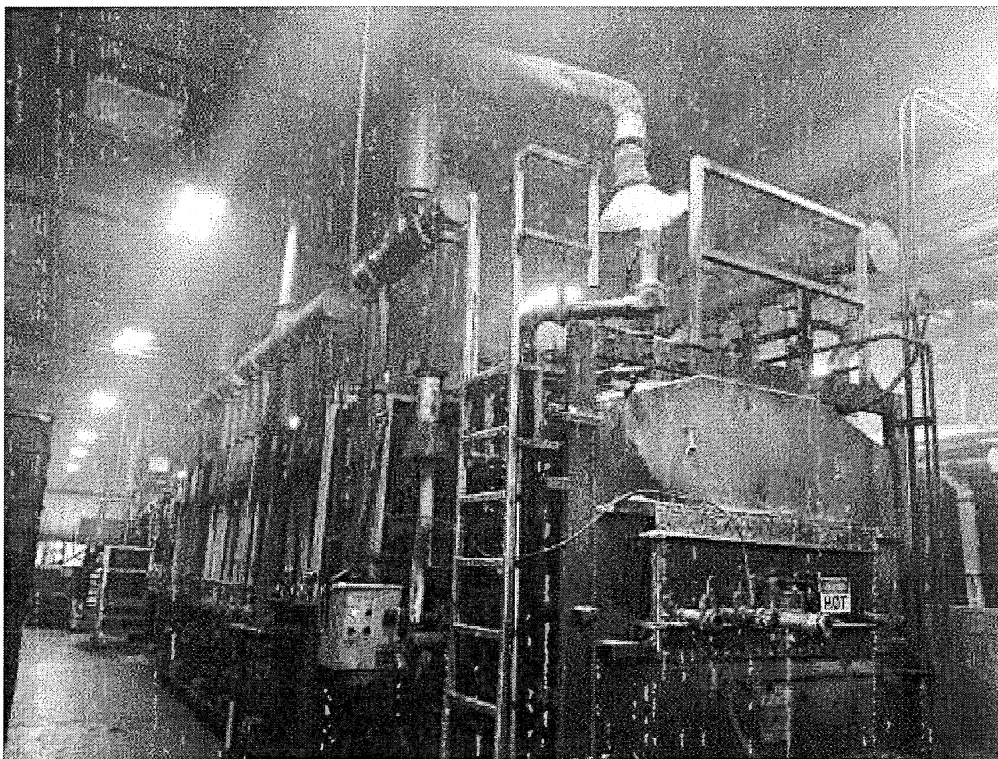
(Heat Treat) : Heat Treat building and hardening furnace
